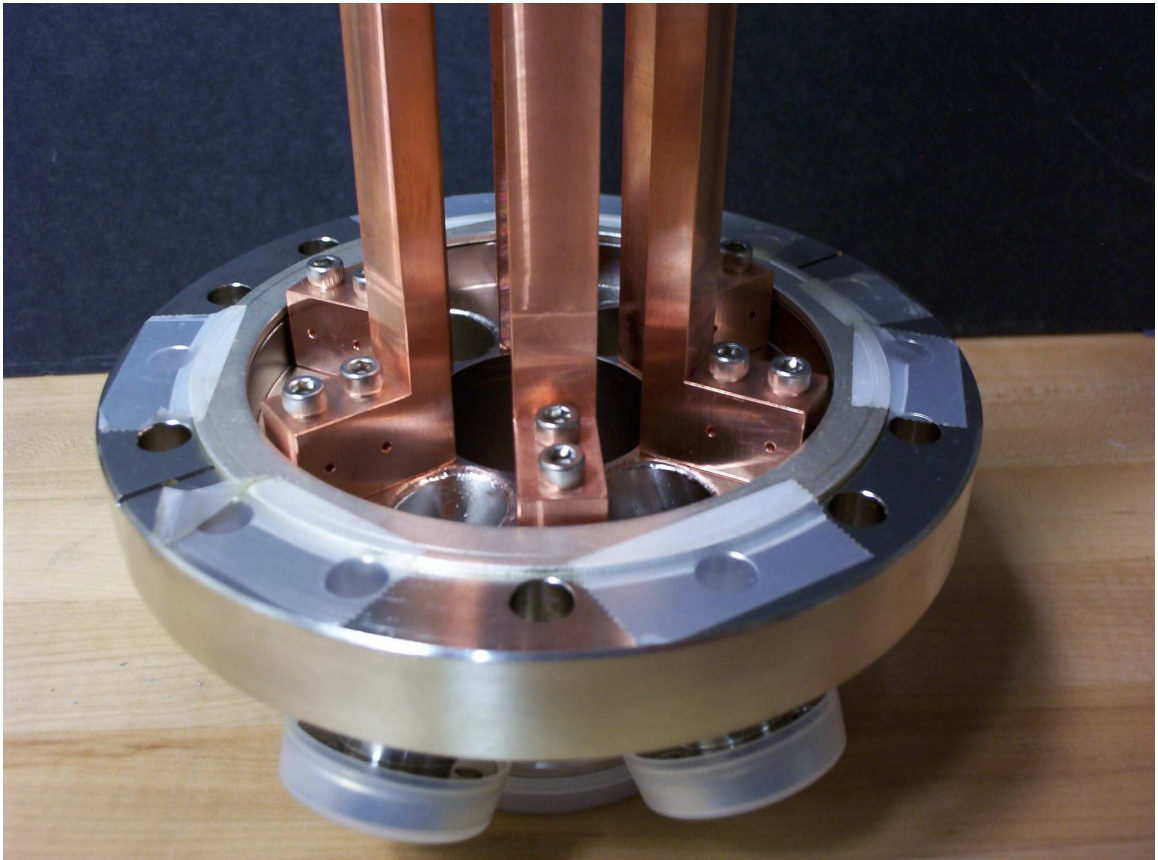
Closeup of how the stack attaches to the vacuum flange
